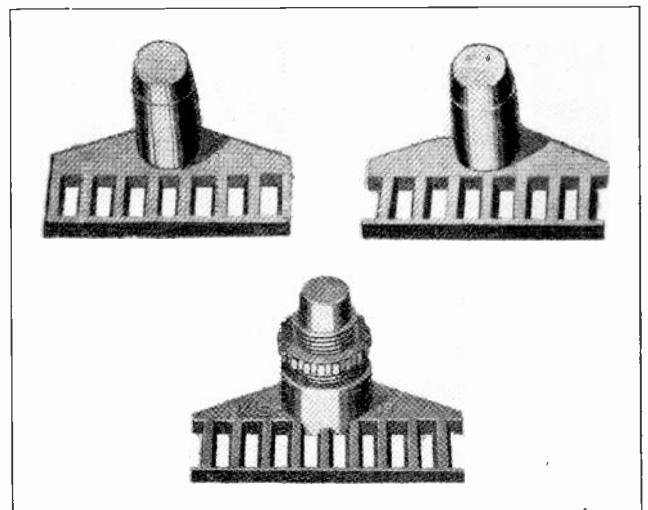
Plain and threaded terminal posts and plate connectors for attaching positive and negative plates together in groups.
